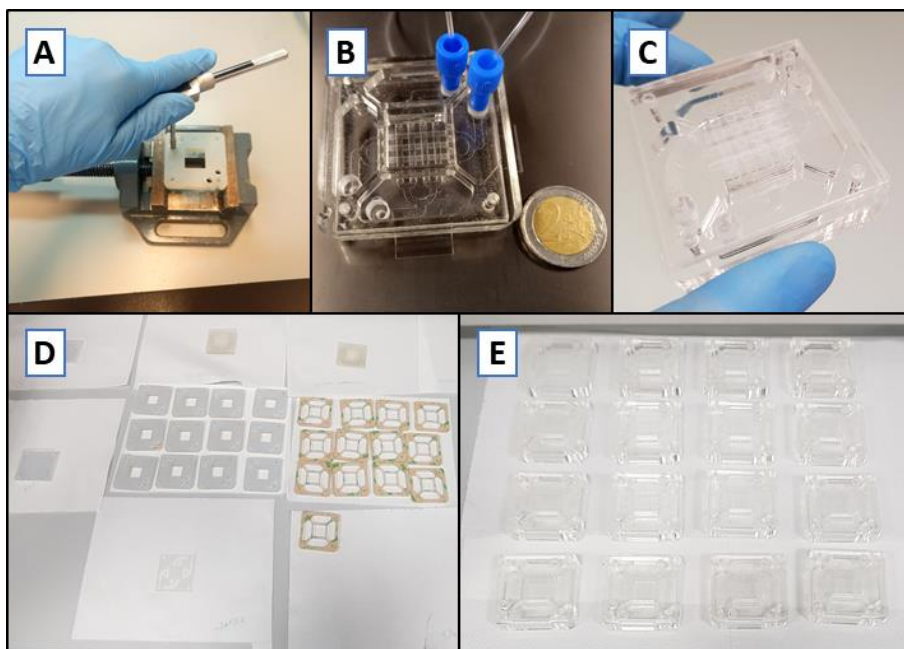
OOC v2.1 fabrication. A) Adding 1/4-28 UNF threads to laser cut holes; B) Top view of final assembled OOC v2.1 (2 Euro coin for scale comparison); C) Bottom view of assembled OOC v2.1; D) Freshly cut layers for batch fabrication of 20 devices and E) the respective assembled devices.
